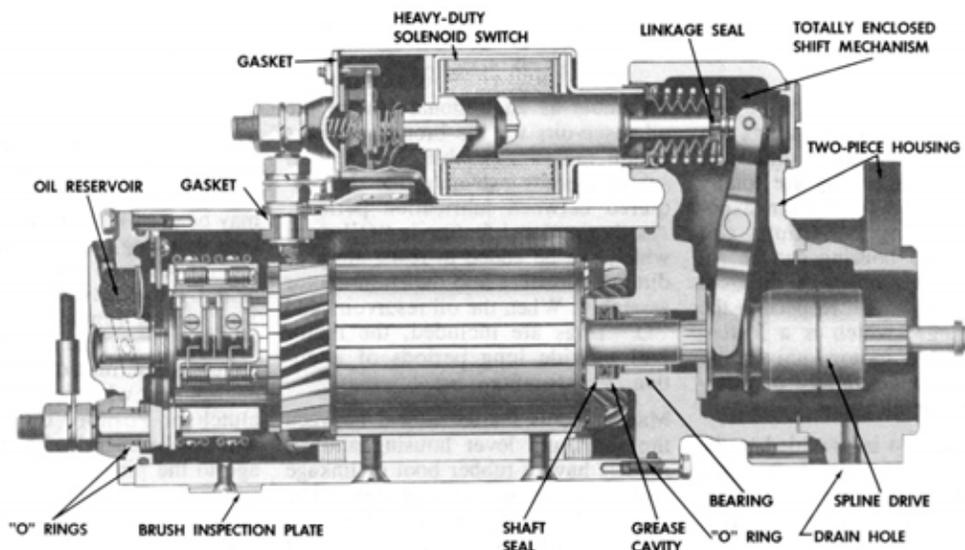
Cross-sectional view of motor with spline drive (50-MT).
